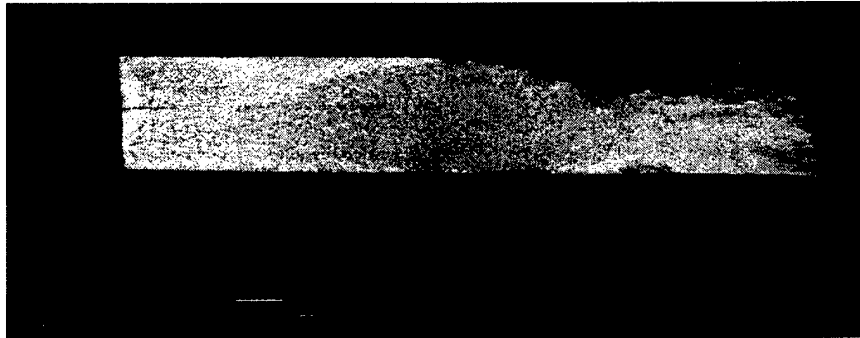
Sample Corrosion Fatigue Fracture Surface for 7075-T6
